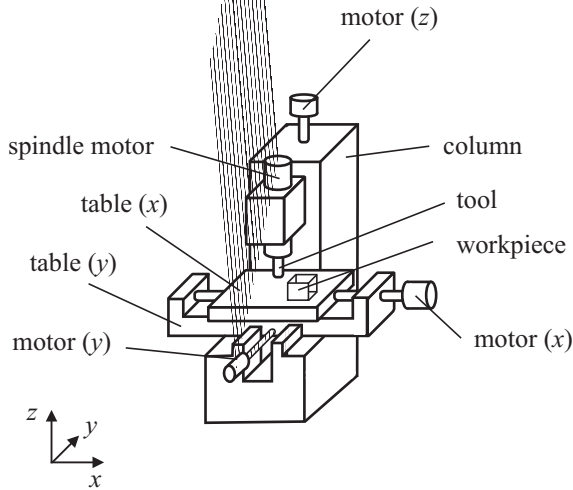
Scheme of a machine tool for milling and drilling. One spindle drive and three feed drives
